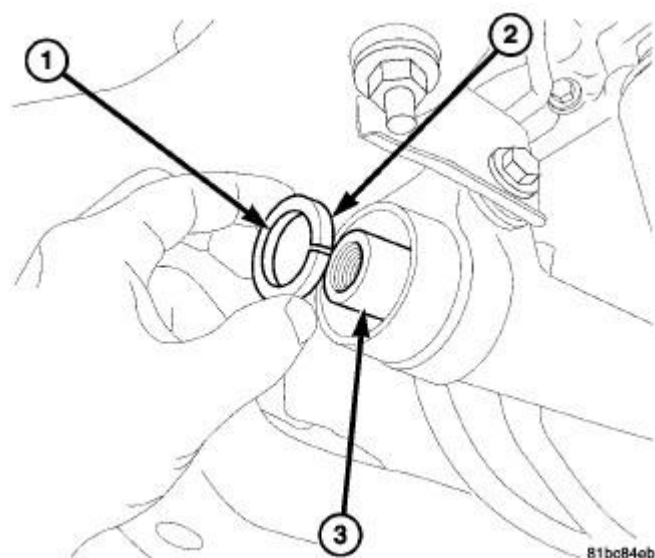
RESTRICTOR REMOVAL/INSTALLATION
